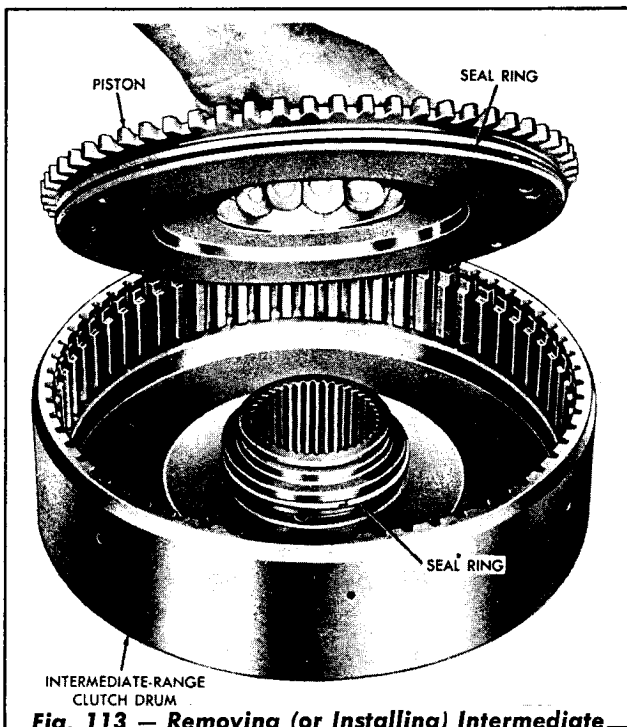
Removing (or Installing) Intermediate Range Piston Assembly
